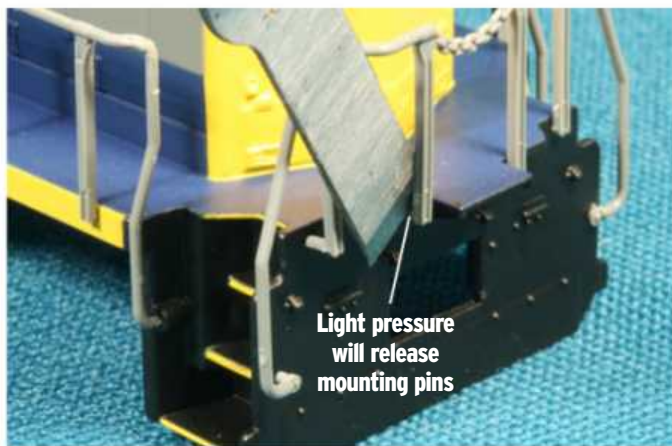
HANDRAIL REMOVAL. A no. 17 chisel blade makes it easy to pry off the end handrails to make room for drilling holes and detailing the end of the hood.
